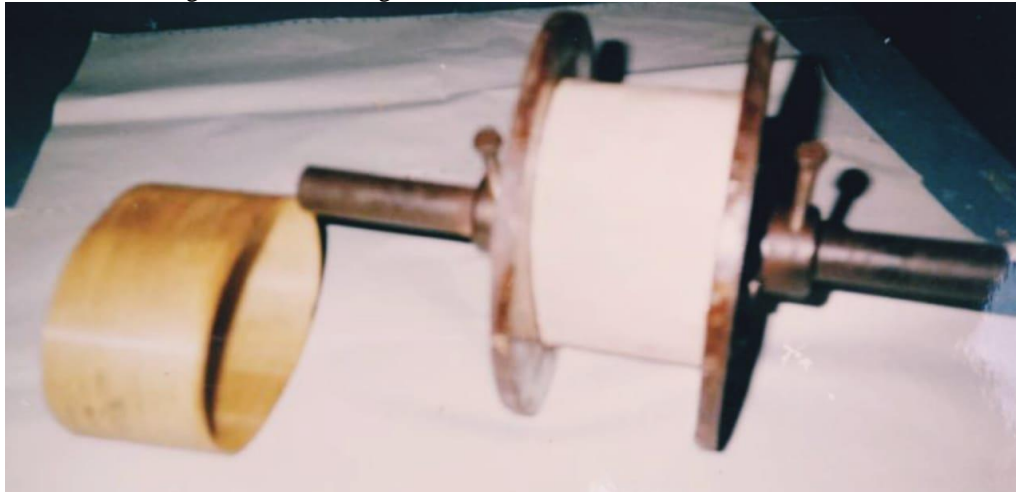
Mandrel used for the fabrication of spring element and sample fabricated spring element
